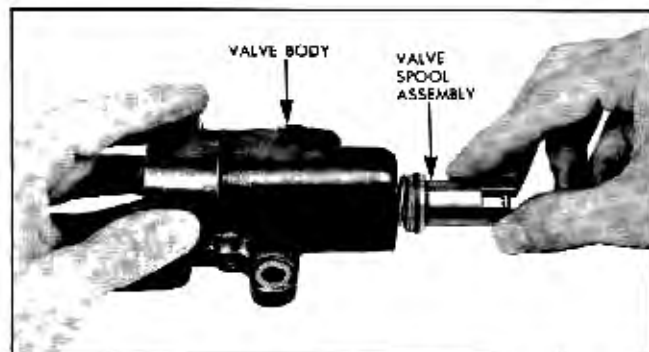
Valve Spool Assembly Started in Valve Body
